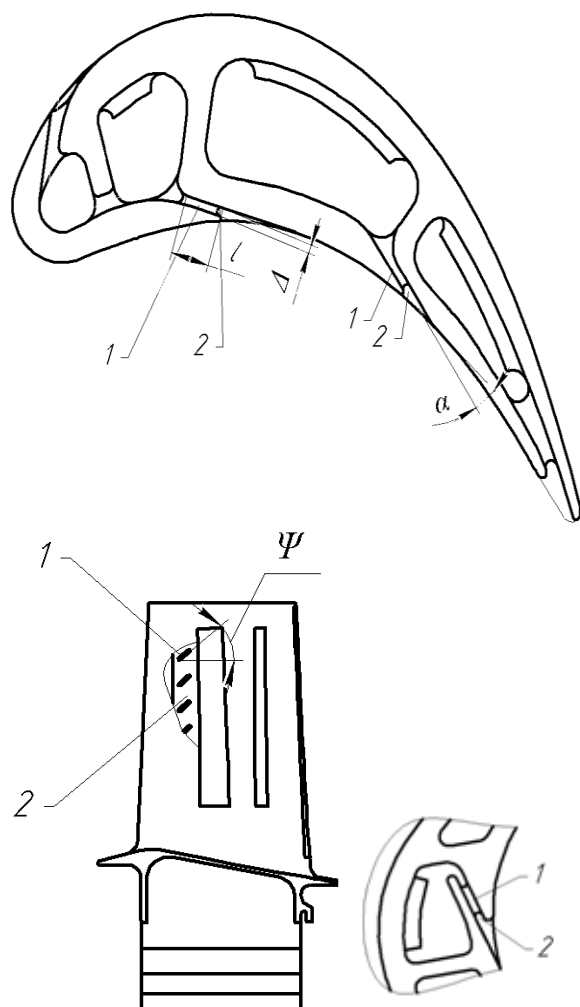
HPT rotor blades with a slot film cooling of concave side of the blade
